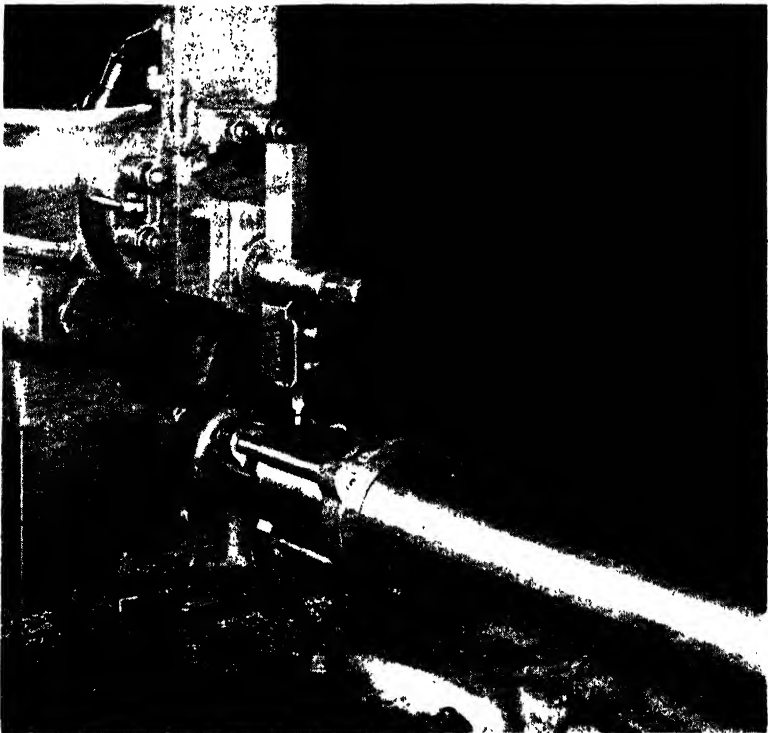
Close-up View of Transverse Tool-head on an Armor-plate Planer which is Engaged in Taking a Cut across the End of an Armor-plate Section
